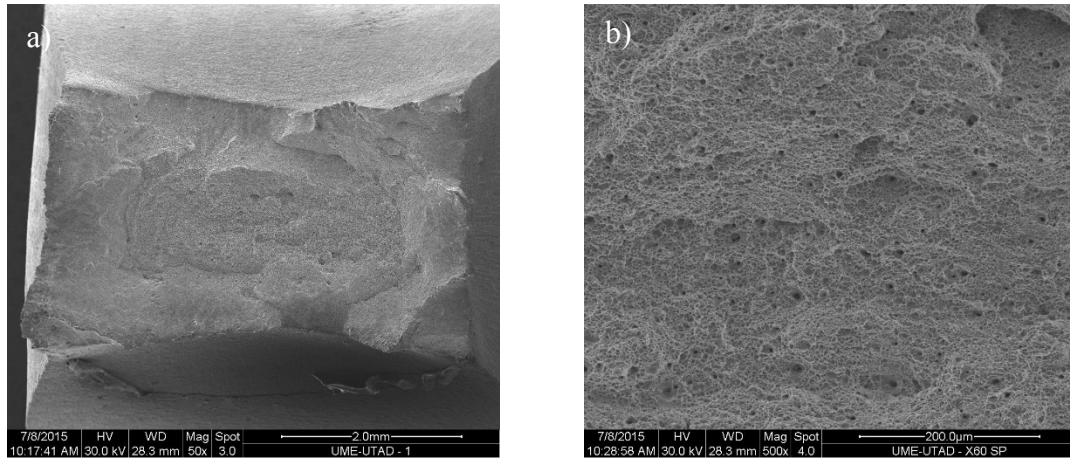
Fracture surface of a smooth plane specimen of X60 piping steel: a) general view; b) detail view of material porosity.
